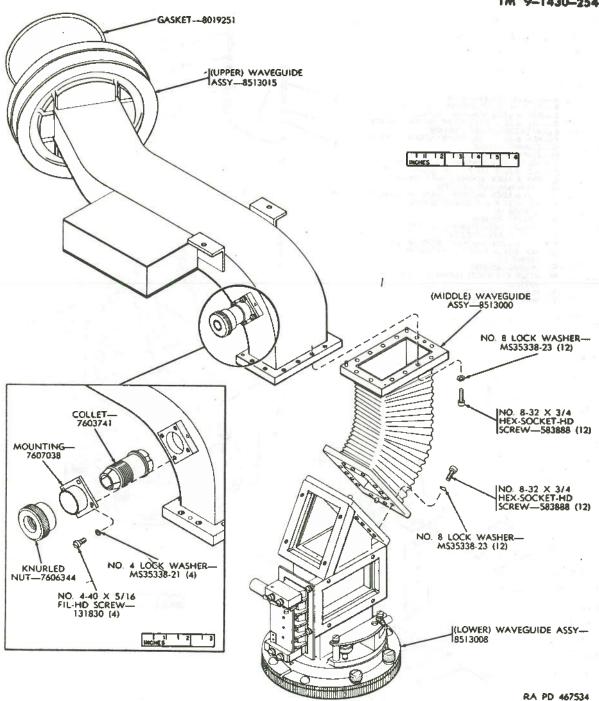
Acquisition duplexer 8512993—partially exploded view.
